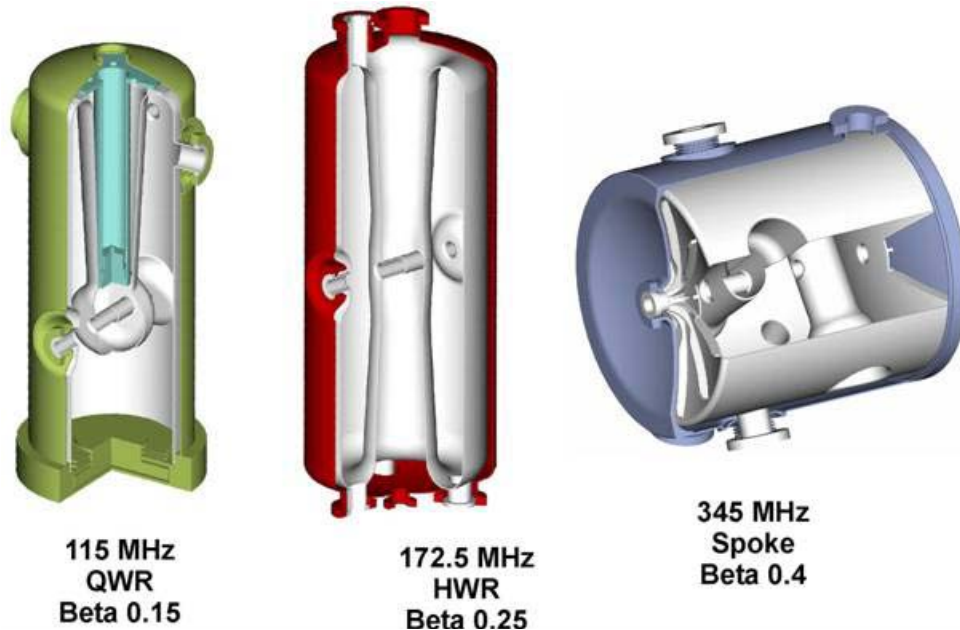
Cut-away section views of the niobium shell and stainless-steel housing of three drift-tube loaded cavities for the RIA driver linac
